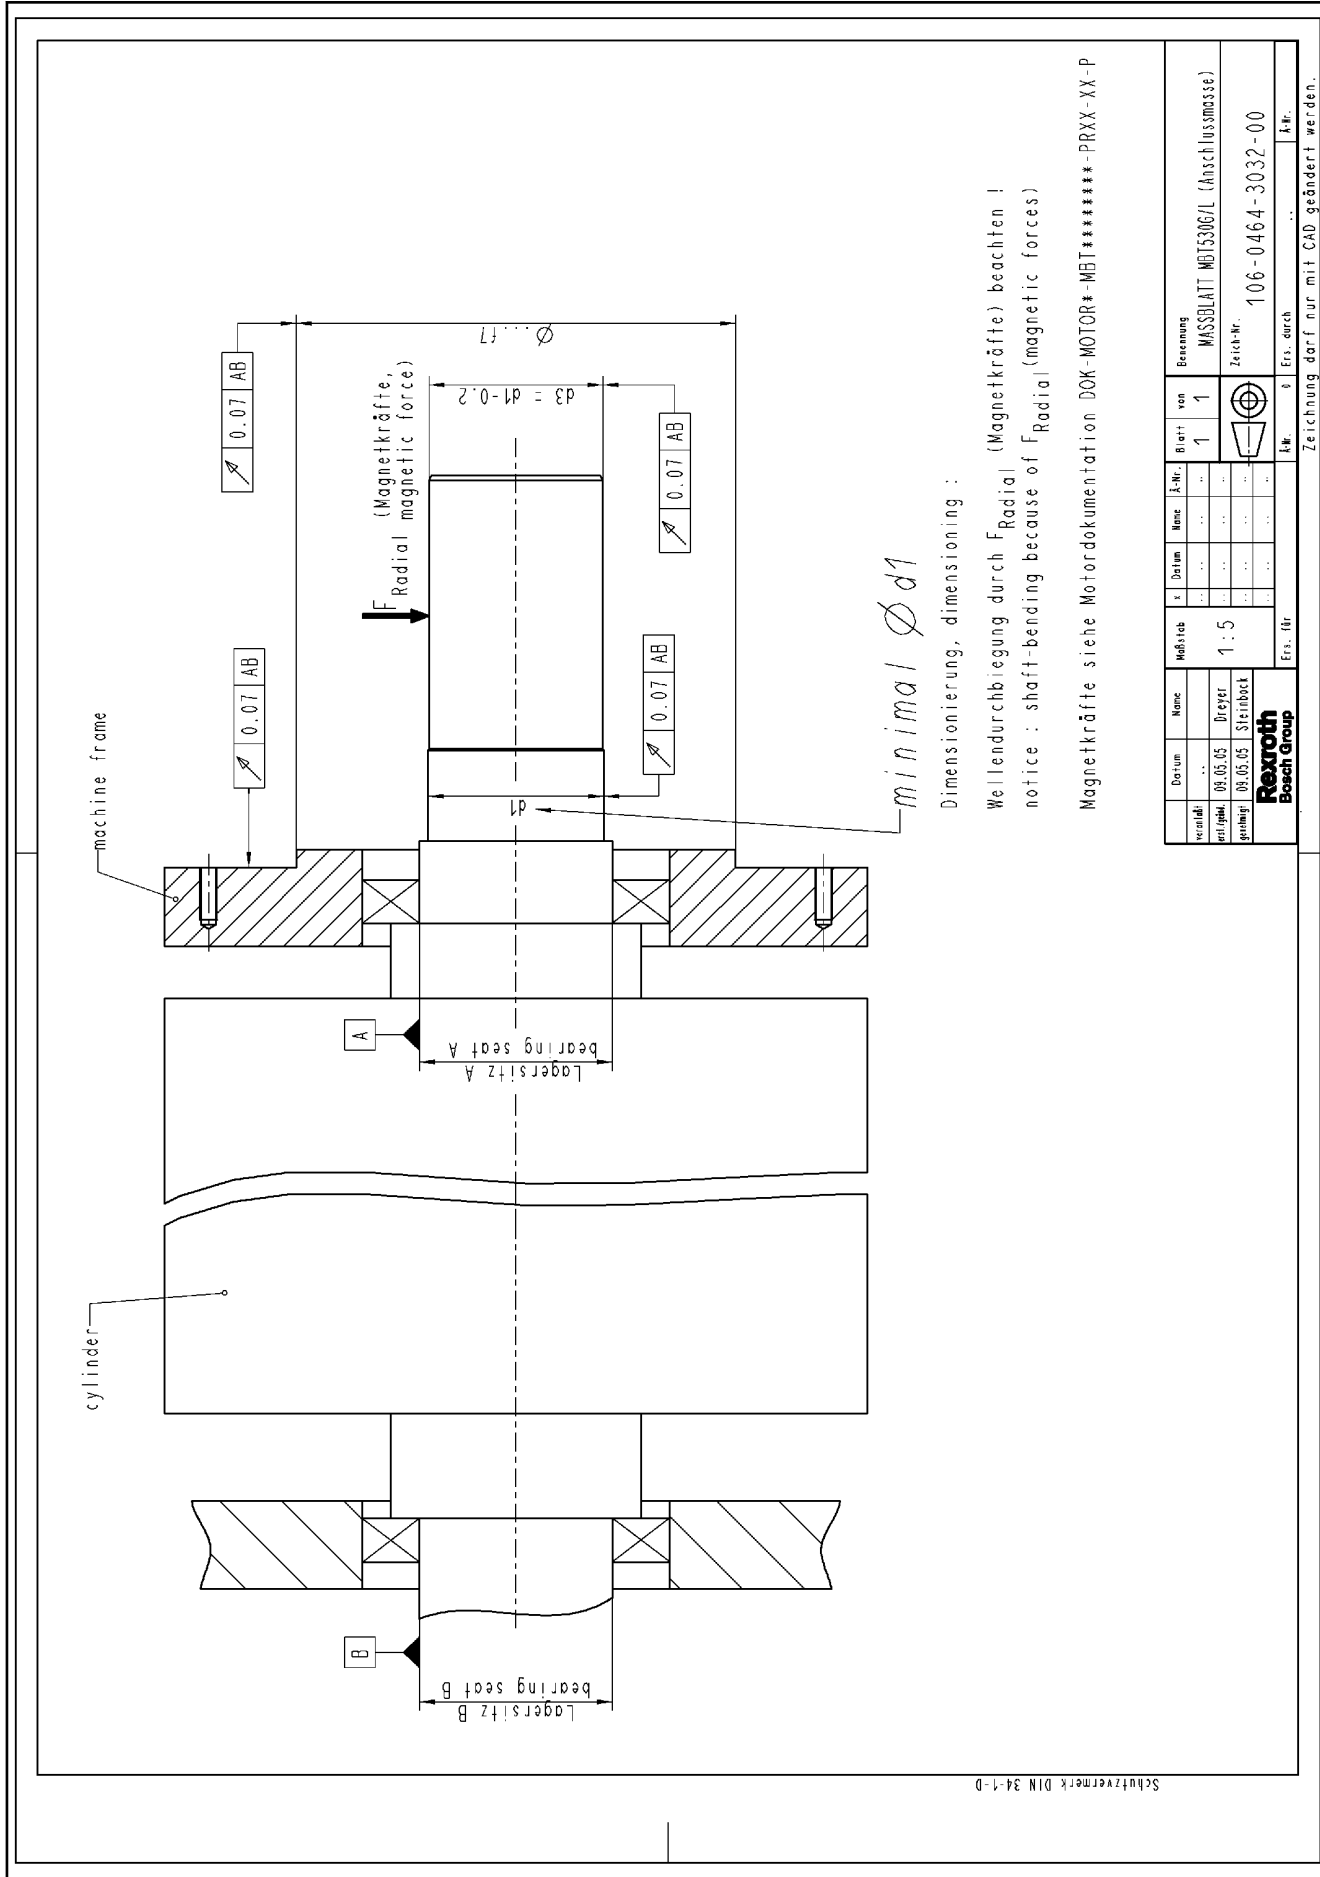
Dimension sheet for rotor MRT530G, 530L
